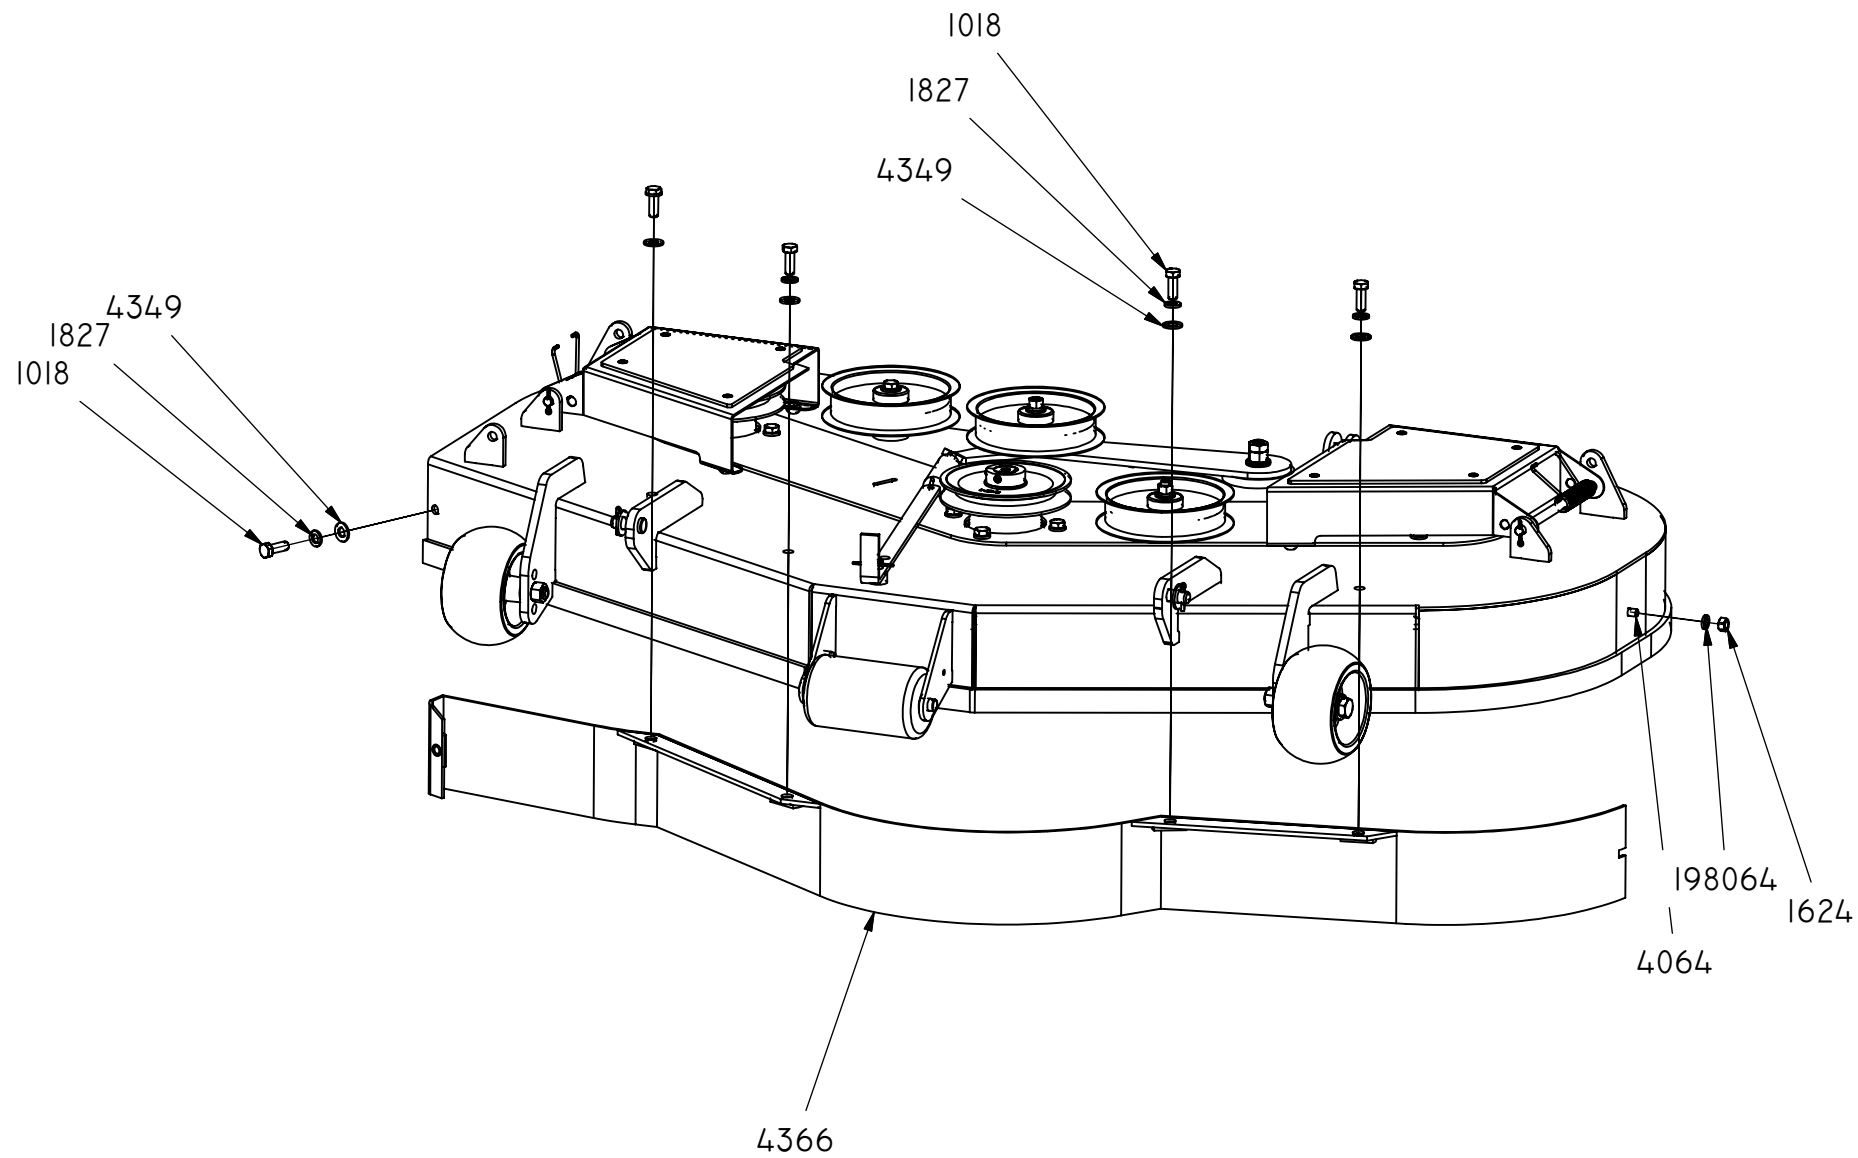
DETAIL ON DECK ASSEMBLY IS ON FOLLOWING PAGES.
